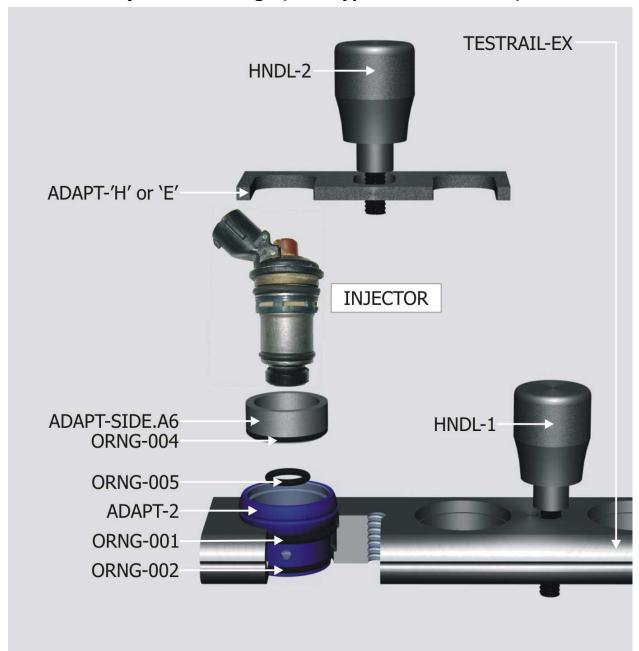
ix, Side-Feed Type (A) Fitting Illustration (4)
